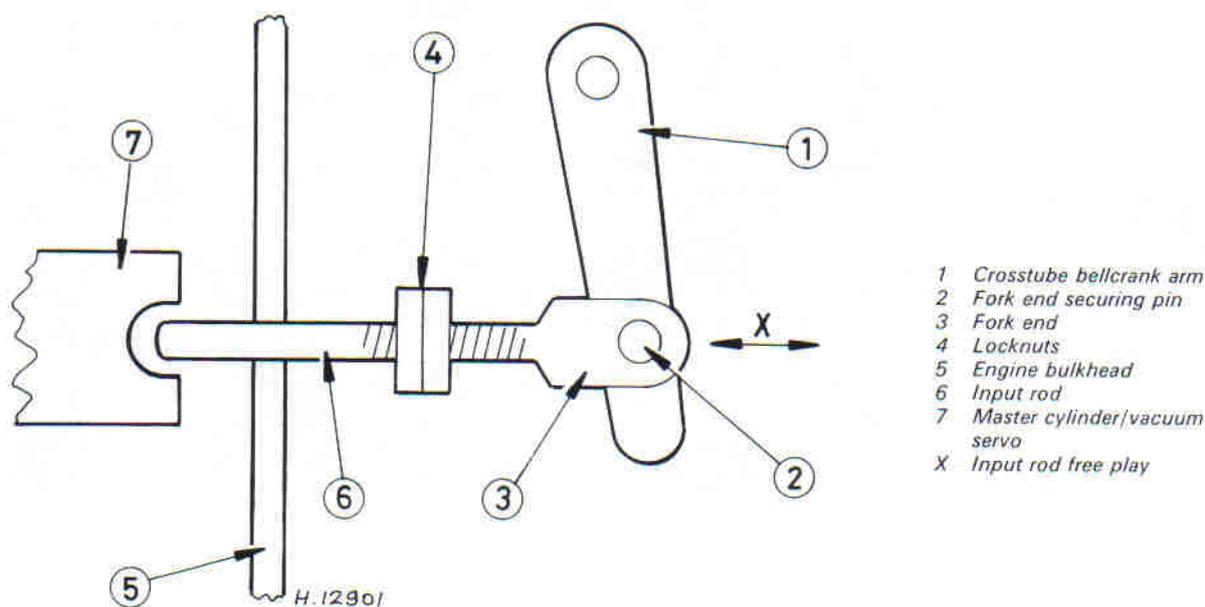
Sectional view of master cylinder/vacuum servo input rod (Sec 10)
